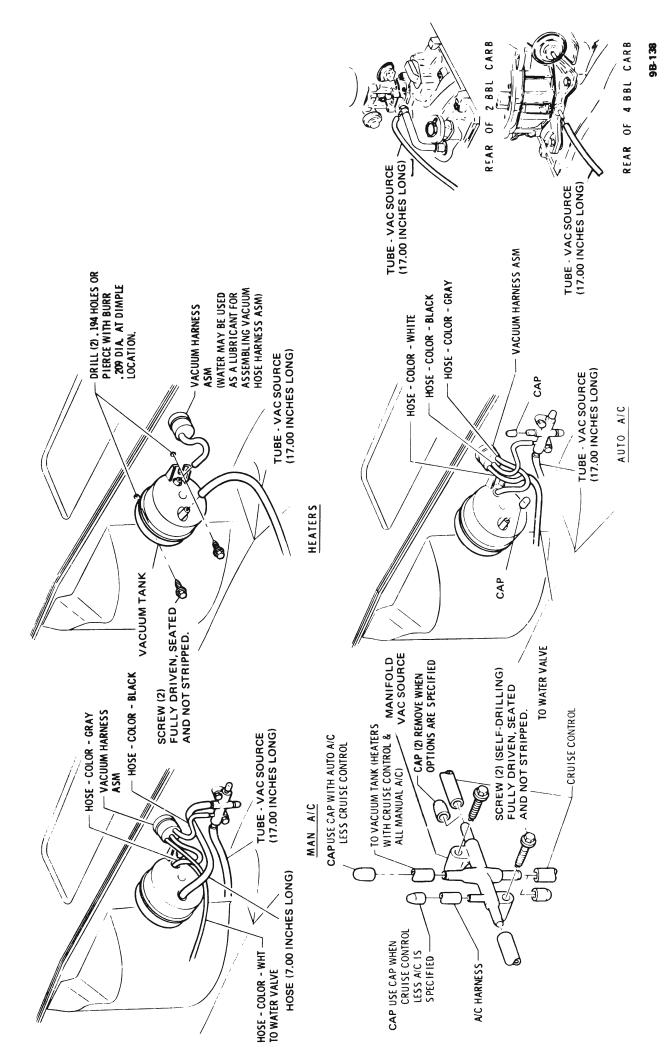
B-180 A/C and Heater Vacuum Harness to Vacuum Tank and Manifold - B-C-E Series
